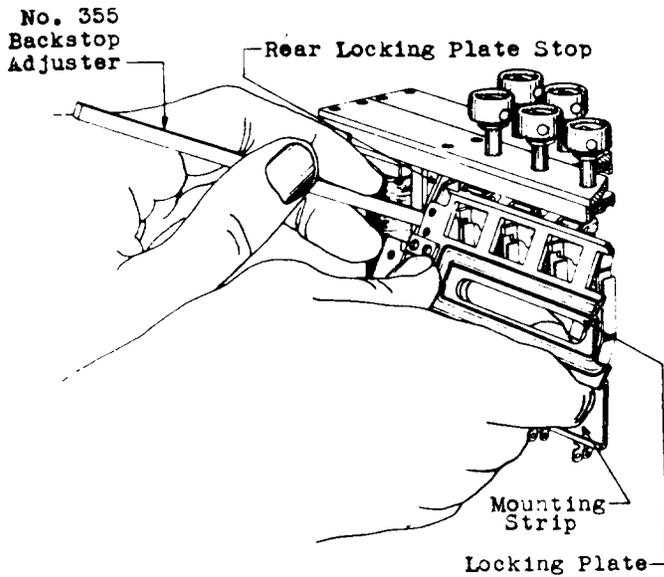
Method of Adjusting Rear Locking Plate Stop on E2 Type Keys
